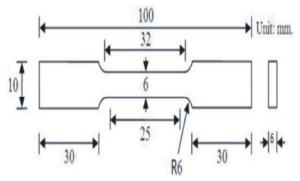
Dimensions of the tensile specimen according to ASTME8M
